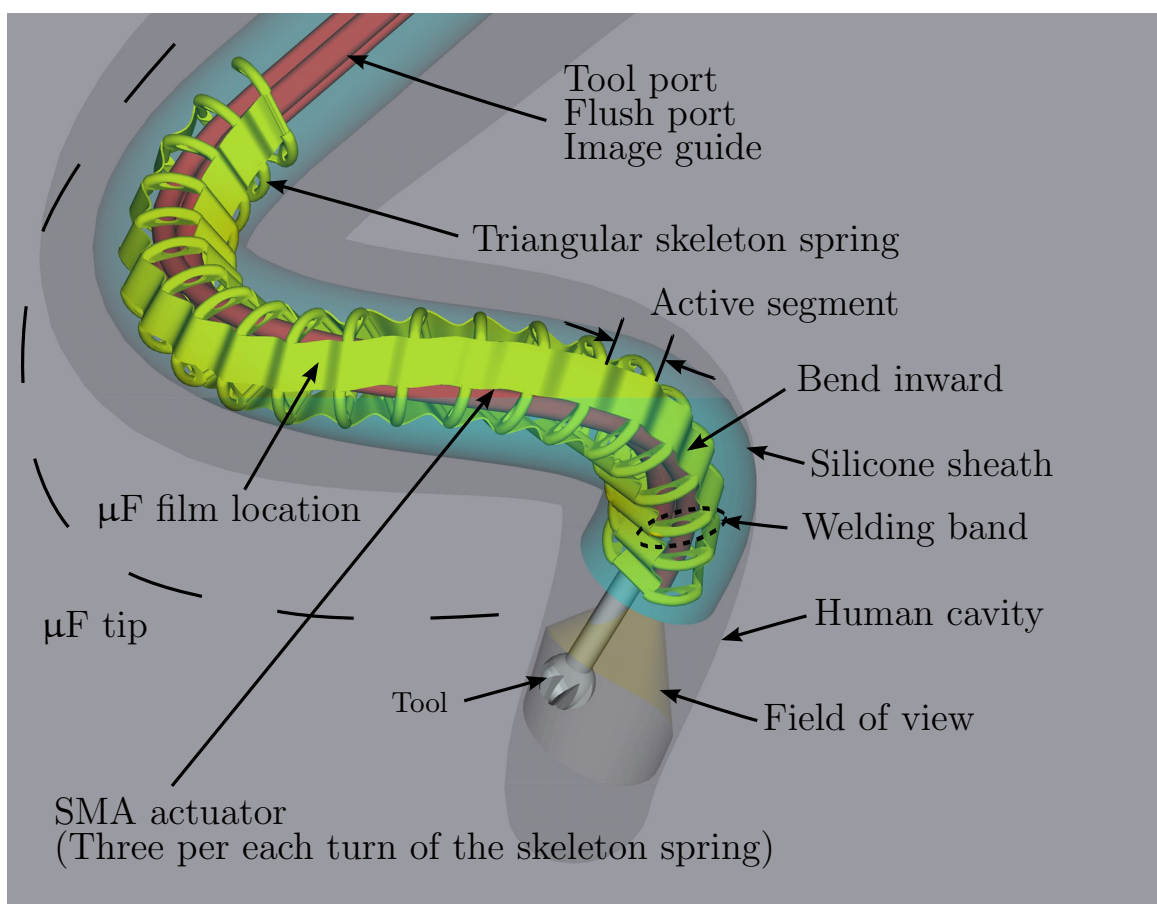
CAD drawing of a μ F tip prototype presented in [Aphanuphong, 2008], drawing courtesy of Quest Product Development Corp.
